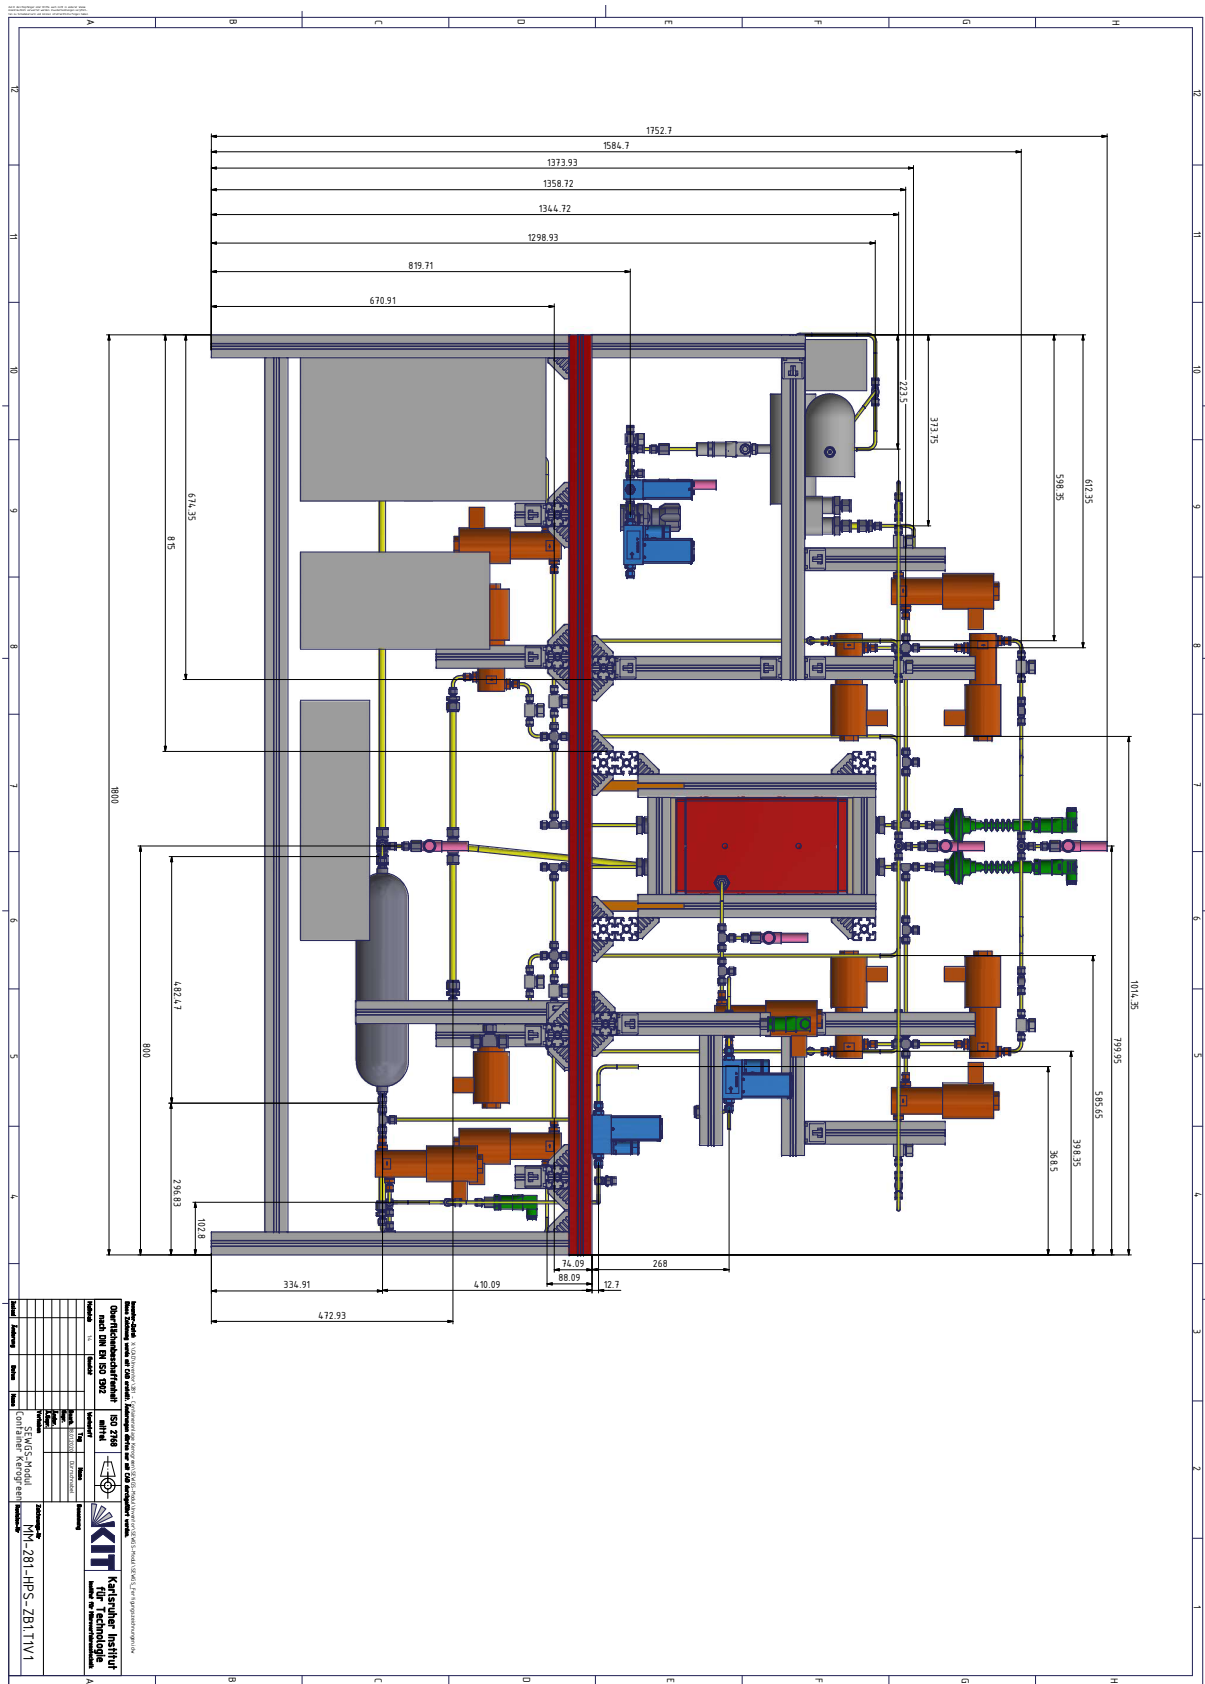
CAD drawing (side view) of the SEWGS module.
